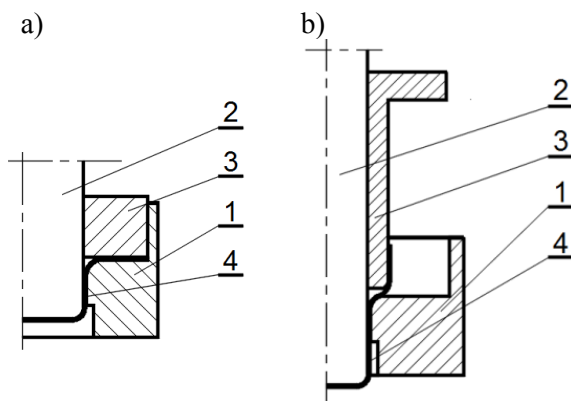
Diagrams of the main parts of deep drawing tools used in investigations: a) tooling for single drawing (where 1- die, 2 – punch, 3 – blank-holder, 4 – drawpiece); b) tooling for redrawing (where 1- die, 2 – punch, 3 – pilot sleeve, 4 – drawpiece).
